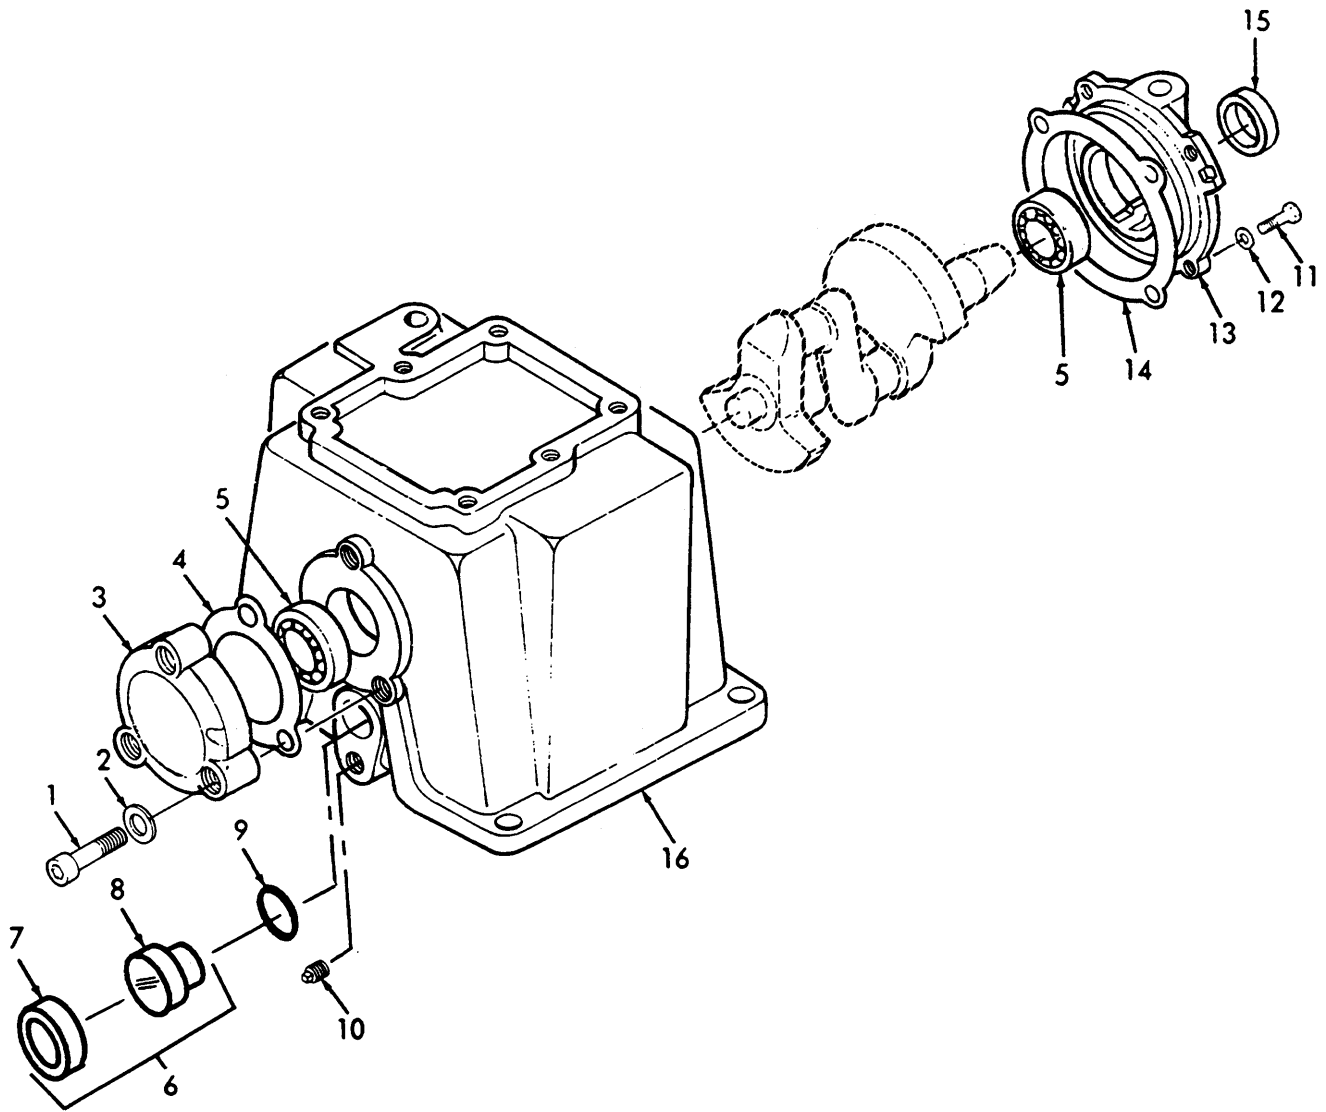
Crankshaft, Bearings, Seals, and Cylinder Block.
